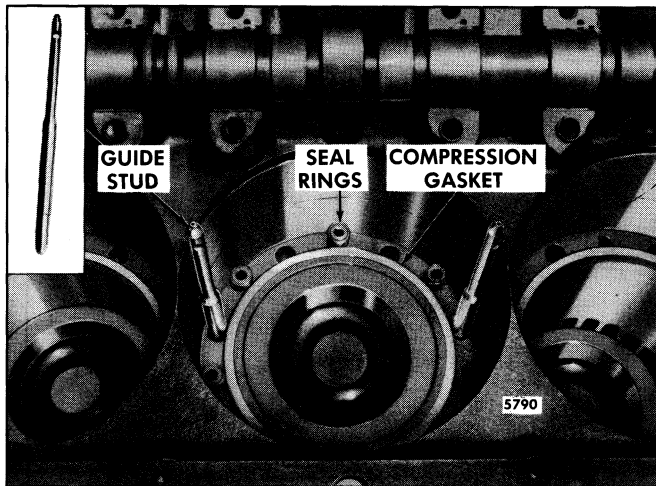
Location of Cylinder Head Compression Gasket and Seal Rings
